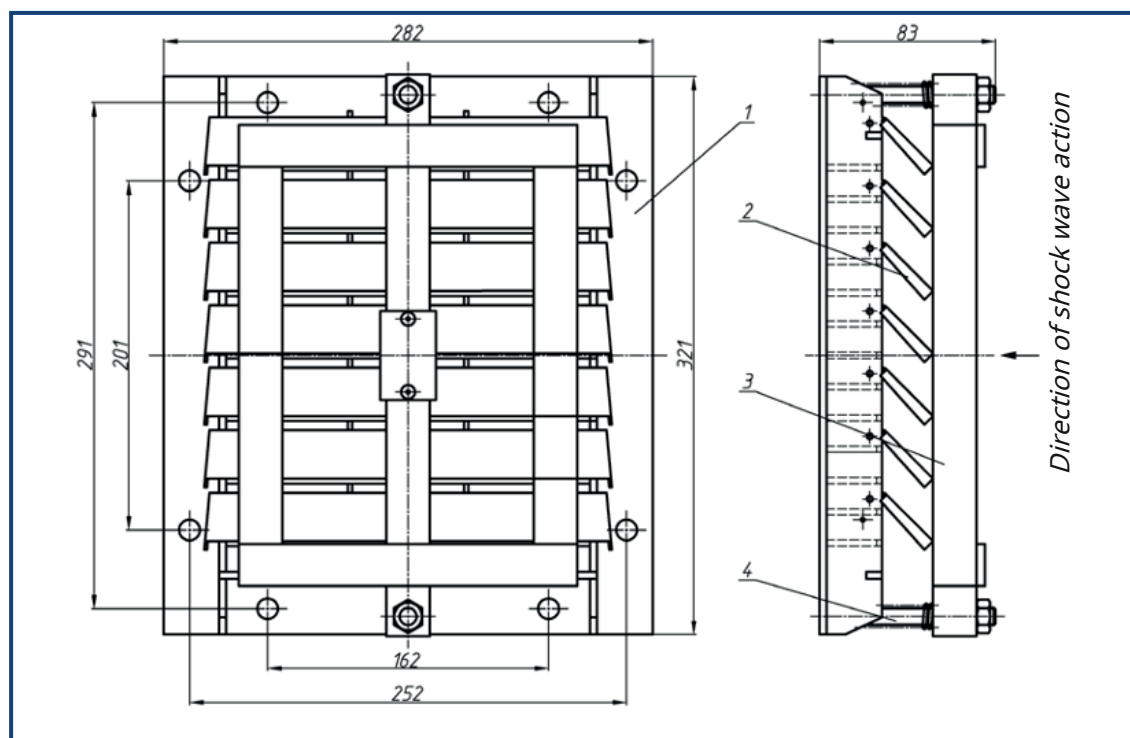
Small-sized protective section MZS 282x321 1 – Frame; 2 – Louvers; 3 - Movable frame; 4 – Adjusting screw
